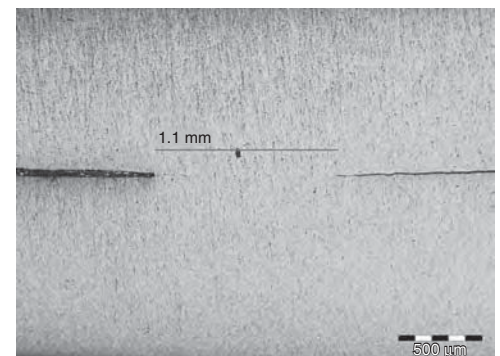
Magnified view of an aluminum-to-aluminum weld zone from magnetic pulse welding. Source: Ref 34
